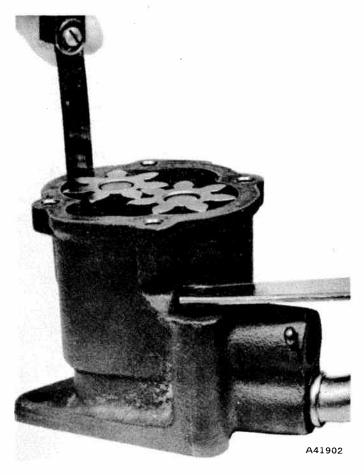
A-33 Oil Gear-to-Body Clearance Measurement
